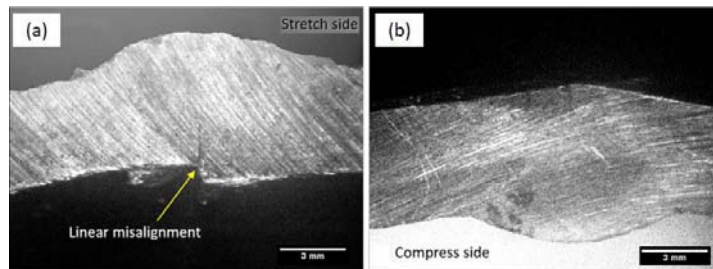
Stereomicroscope images at cross-sectional (parallel to stress direction) of the as-cut weld bead area on (a) stretched and (b) compressed side.
